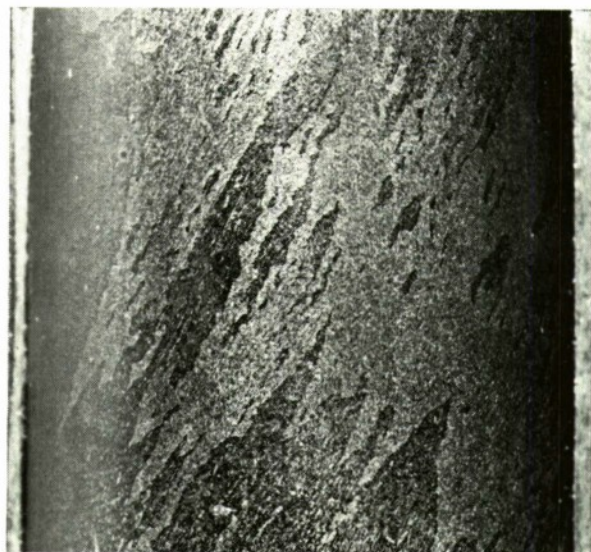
Spiral corrosion pattern in a bend due to rotational motion of water.
